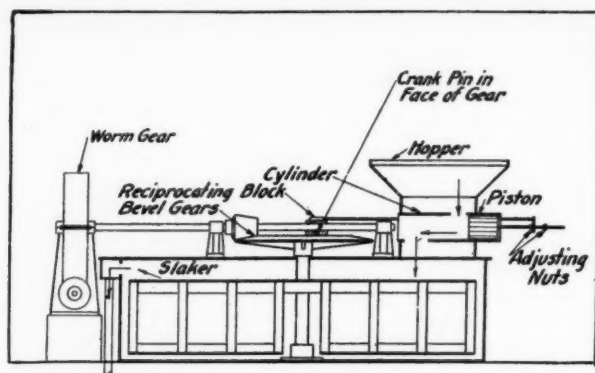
SECTIONAL VIEW OF FEEDER AND SLAKER
